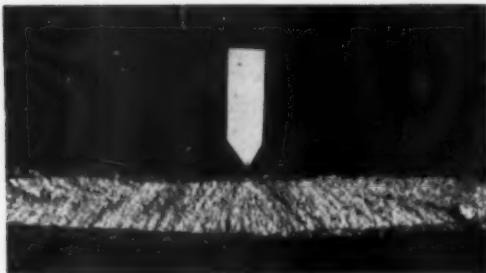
Fracture of Test Vessel No. 21. It had been coated with primer on the inside to prevent contact with water. This had been subjected to sustained loading and fractured at a stress of 262,000 psi. The origin of the fracture was in parent metal under the inside surface about 1½ in. from the nearest weld. There is no discolored area at the origin of fracture. Shear lip is seen along both edges of the fractured surface, even at the origin. There is no discolored area indicative of hydrogen induced failure. 10 ×
